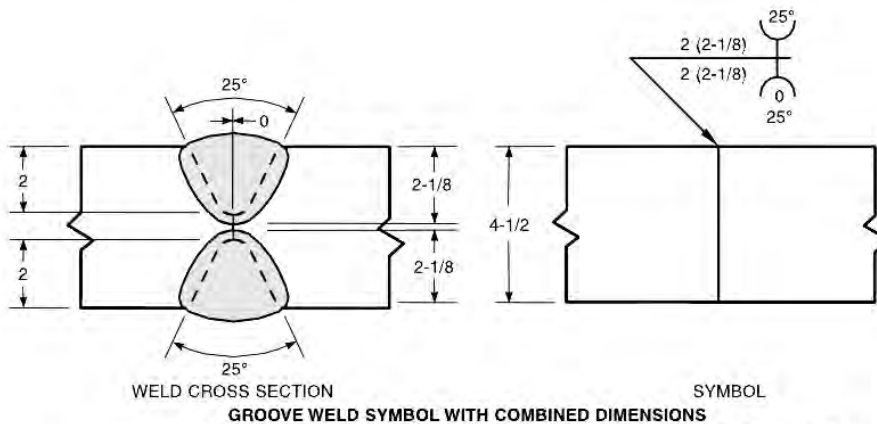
Application of Dimensions to the Groove Weld Symbol
